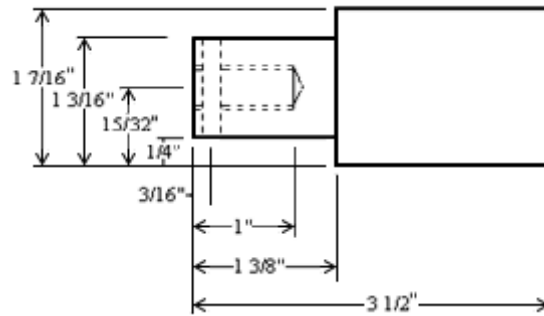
Bottom view of Hook-SH5 (dimensions in inches).
